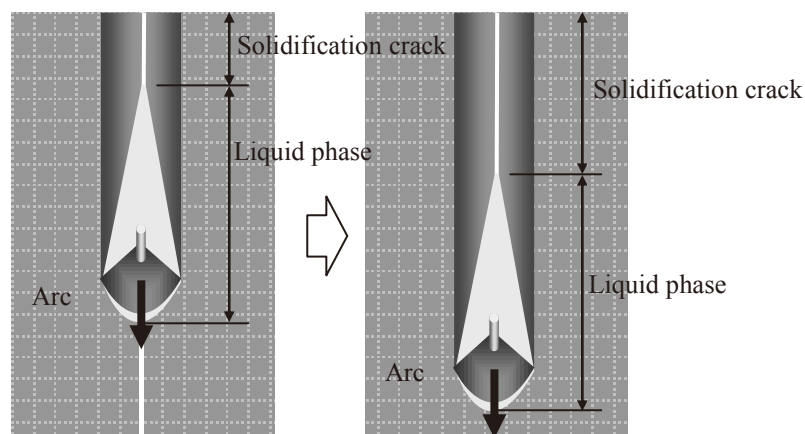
Mechanism of solidification crack following with welding direction
